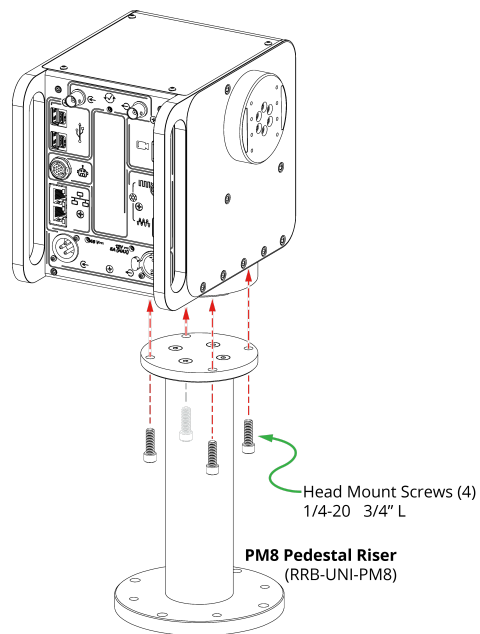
Mounting an X350 Head on a PM8 Pedestal Riser
